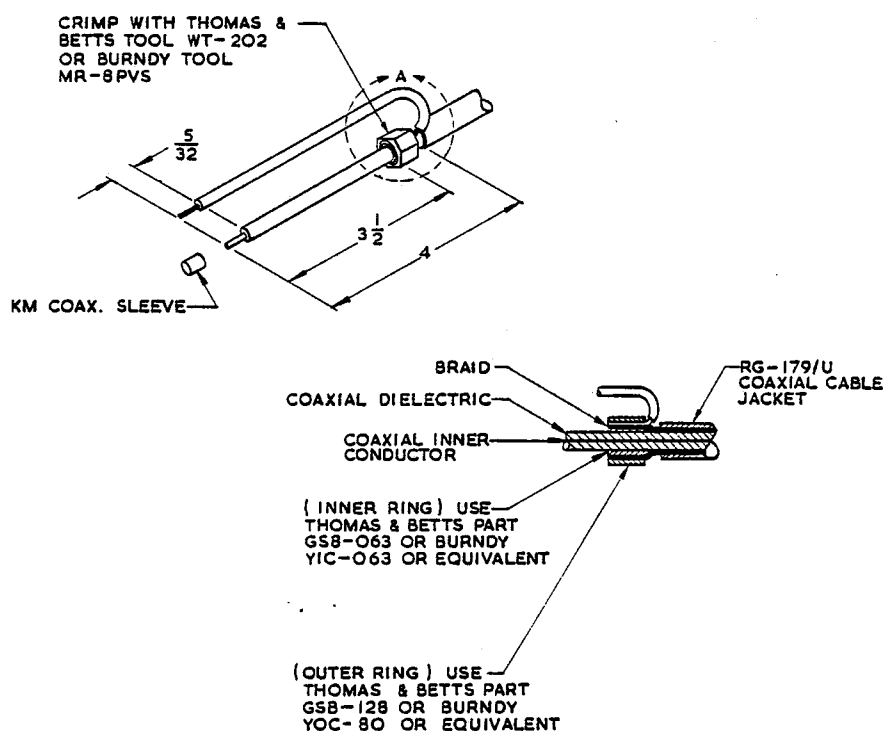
Stripping and shielding RG-179/V coaxial cable
